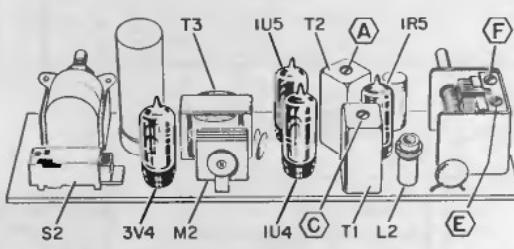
Top View of Chassis 4W2. Tube Locations and Alignment Points Shown.
